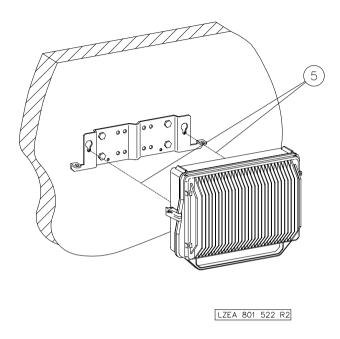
Installation of BRU3 on the base plate (mounted on a wall).
